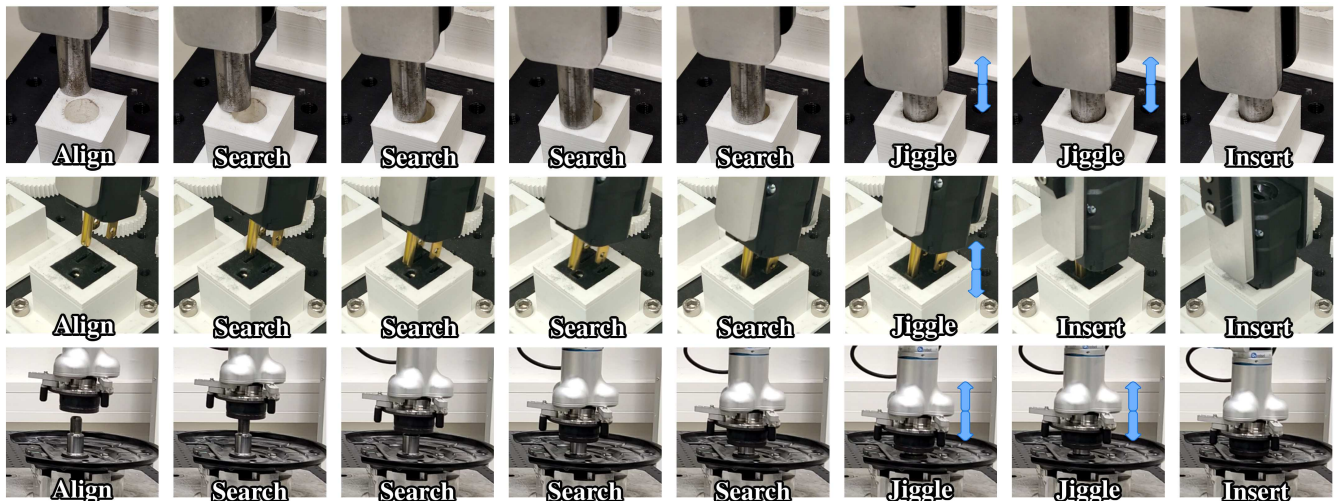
Snapshots of three assembly tasks following our policy. (Top) Medium cylinder peg, (Middle) 3-prong plug, (Bottom) Wheel bearing.
